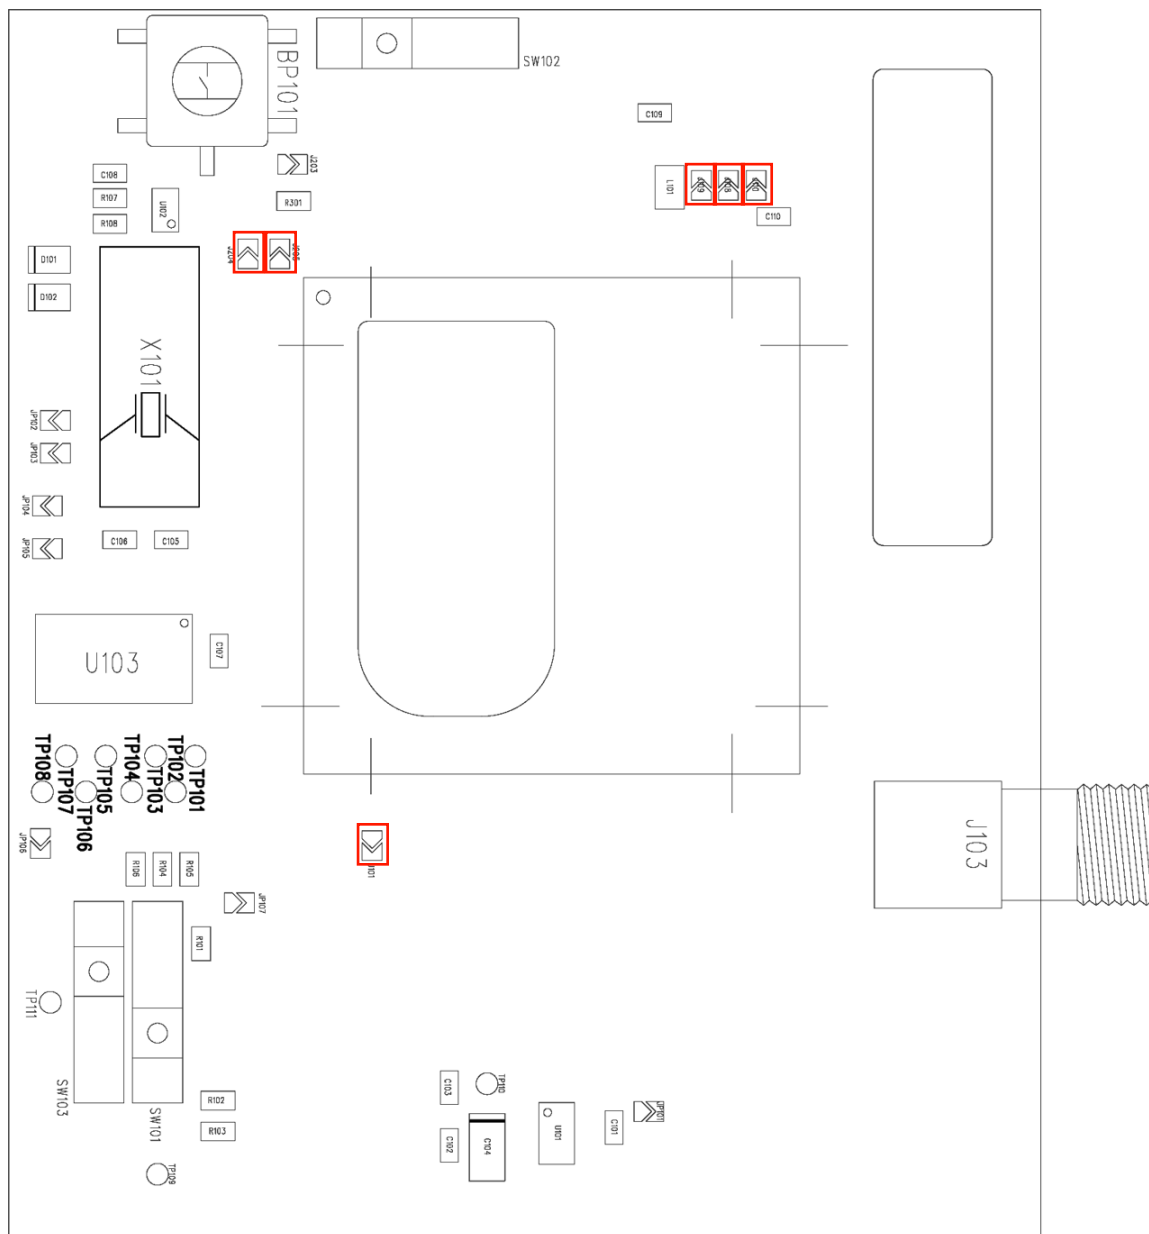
WISMO2x8 Socket Board Default Soldering Configuration for Jumpers (Top View)
